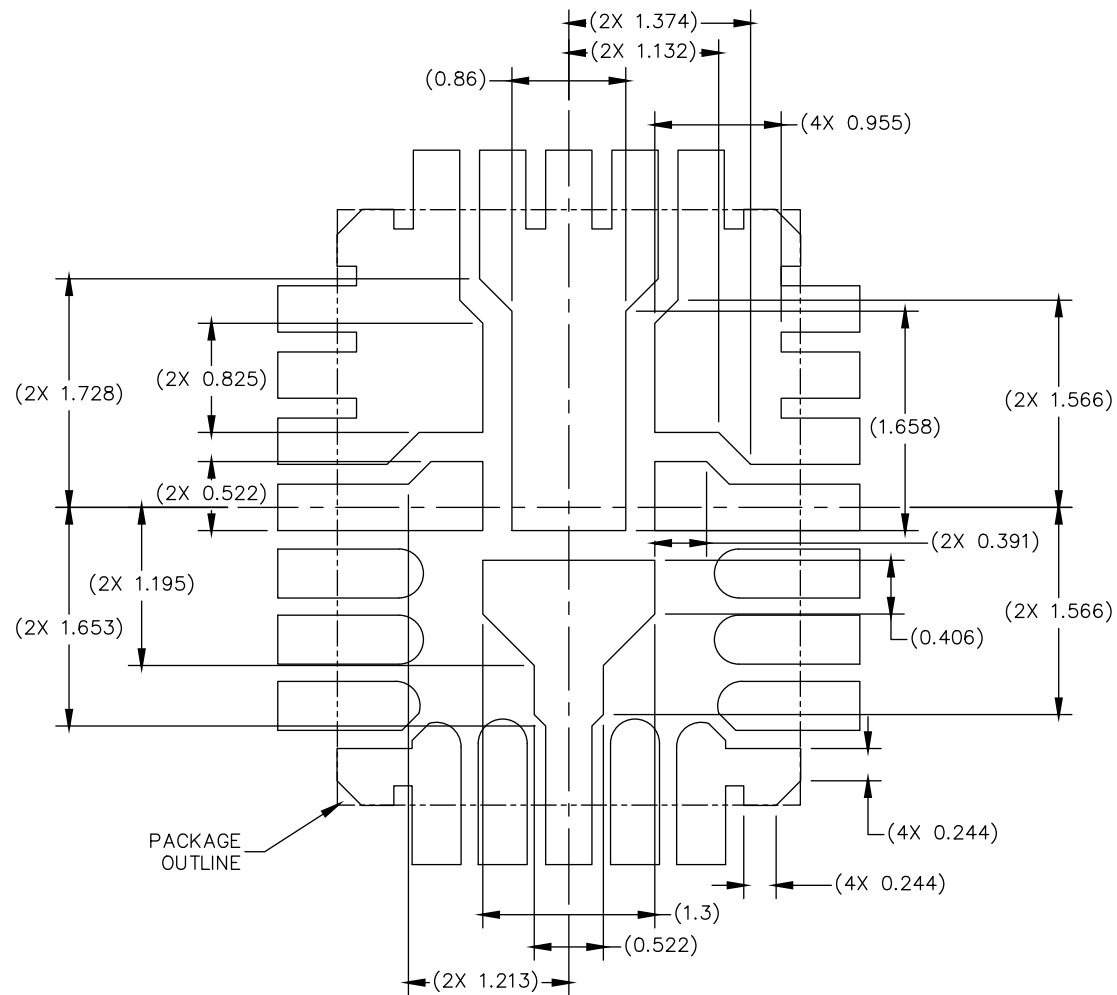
Reflow soldering footprint part1 H-FC-PQFN24 (SOT2090-1))
